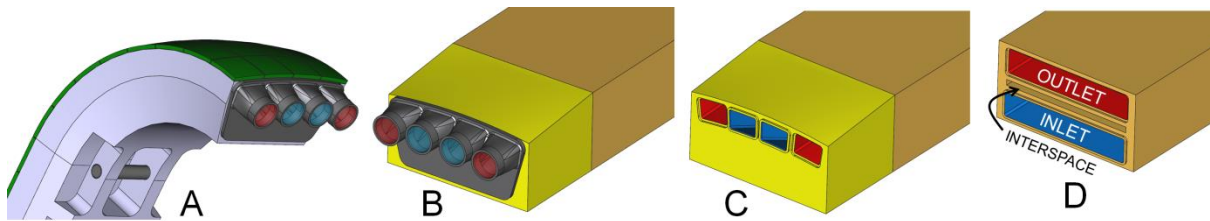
Manifold concept. A: finger inlet/outlet region and weld stubs; B: manifold side weld stubs; C: transition piece; D: manifold side box.
